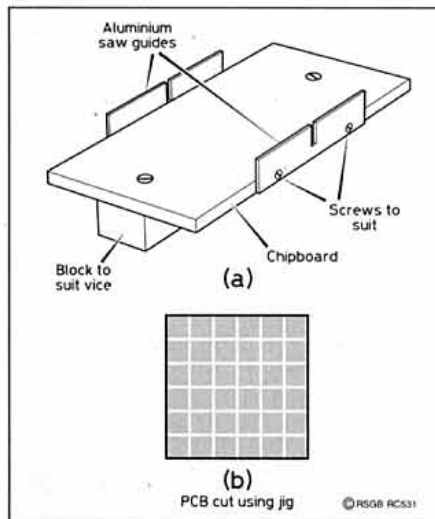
(a): G3VTS's home-made jig used for cutting chequerboard slots in the copper covering of PCB material. (b) Typical appearance of the board after cutting, providing square or rectangular lands to which component leads can be soldered.
